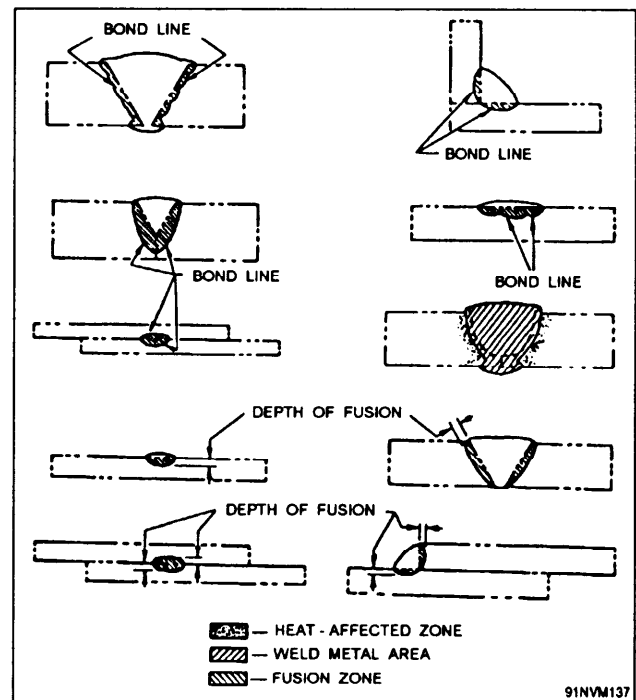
Fusion zone, depth of fusion, heat-affected zone, and bond of weld.
